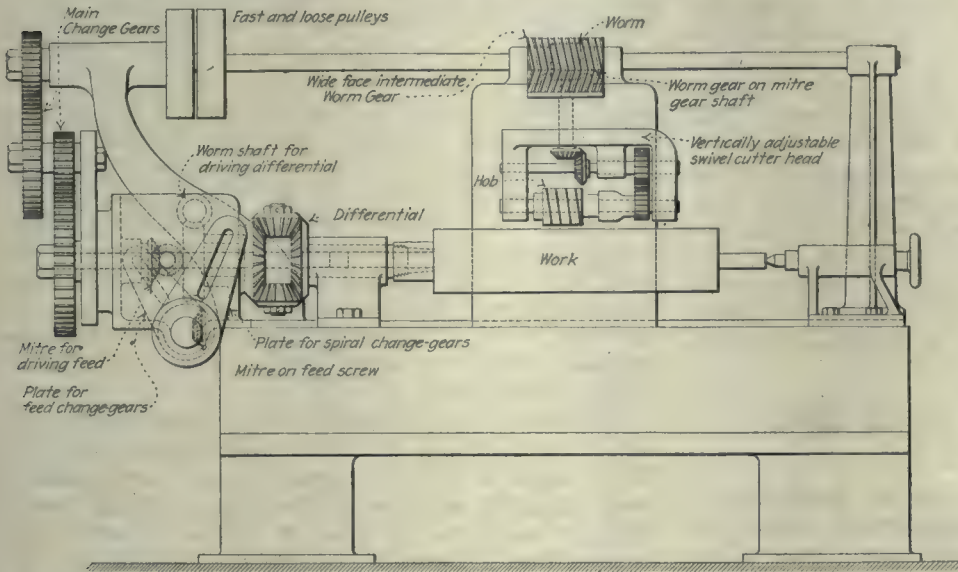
HOBGING MACHINE FOR GROOVING ROLLERS
